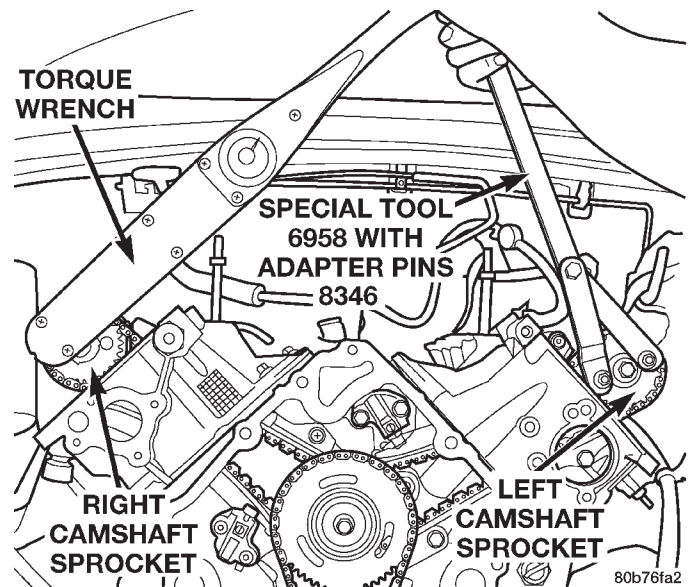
Tightening Right Side Cam Sprocket Retaining Bolt
